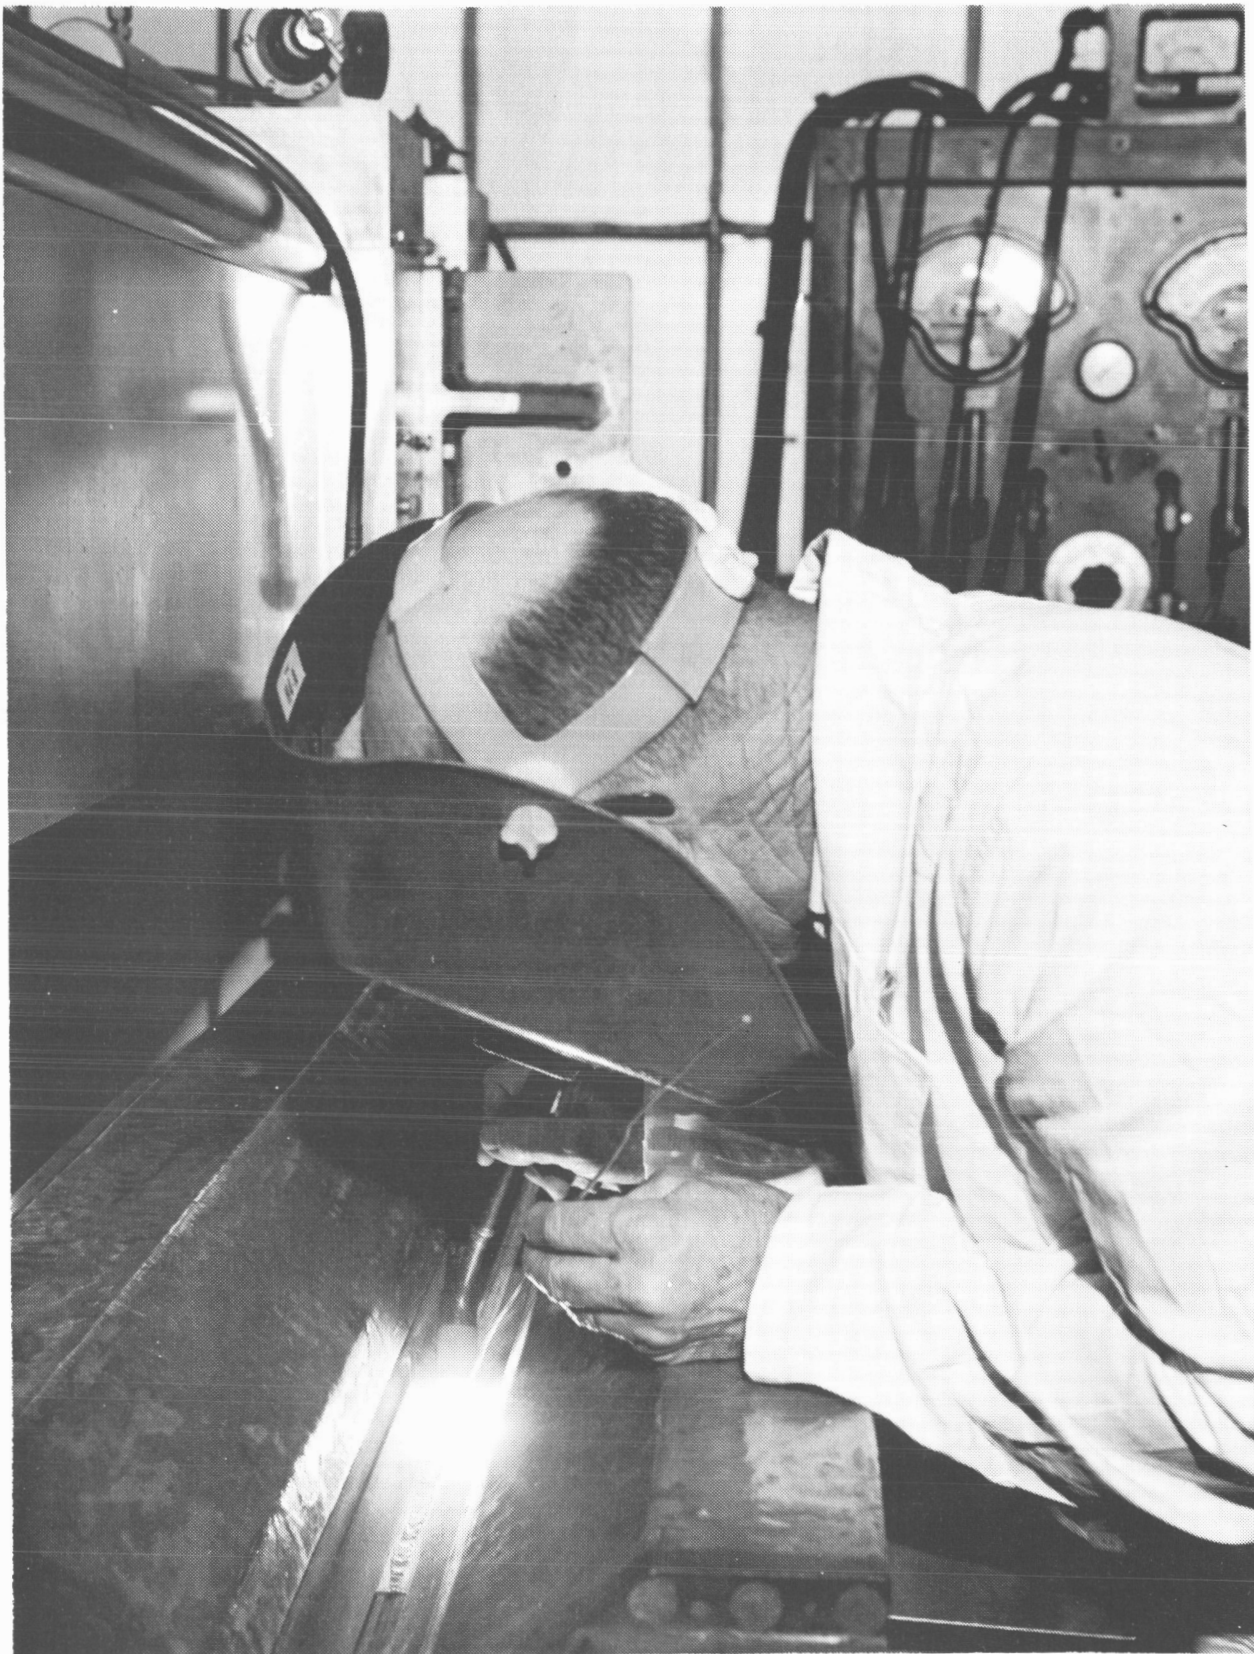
Manual Repair Welding of 2219-T81 Aluminum Sheet
